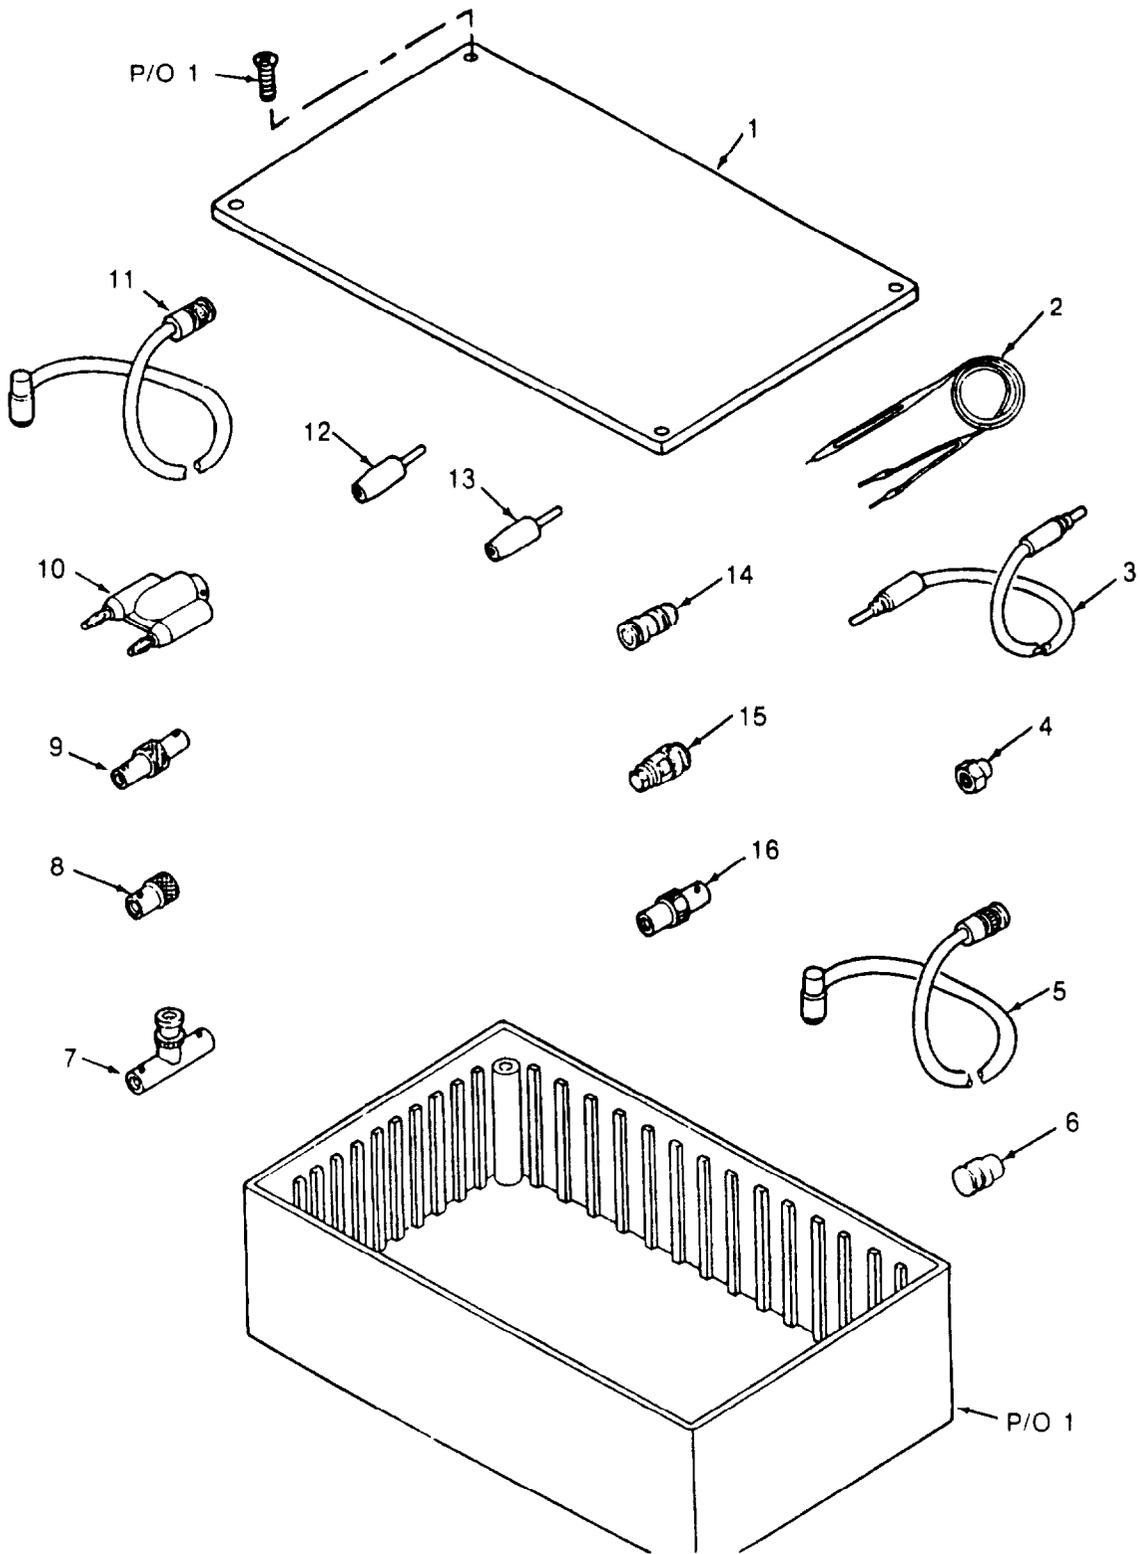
Electronic System Tool Kit (Sheet 3 of 3)
